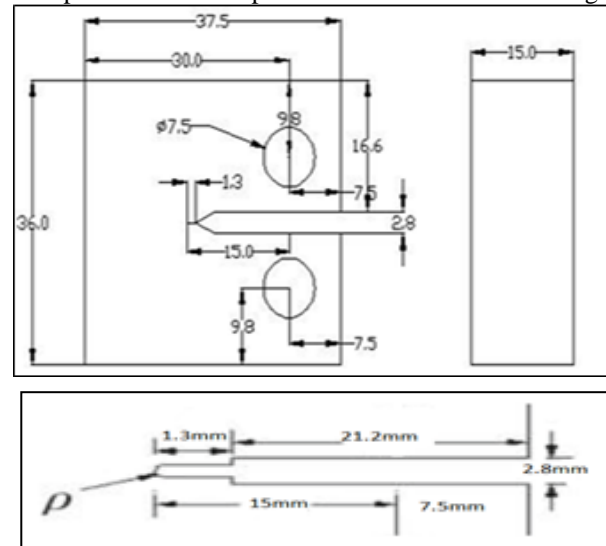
specimen dimensions following ASTM E 399-13 all dimensions in (mm).
